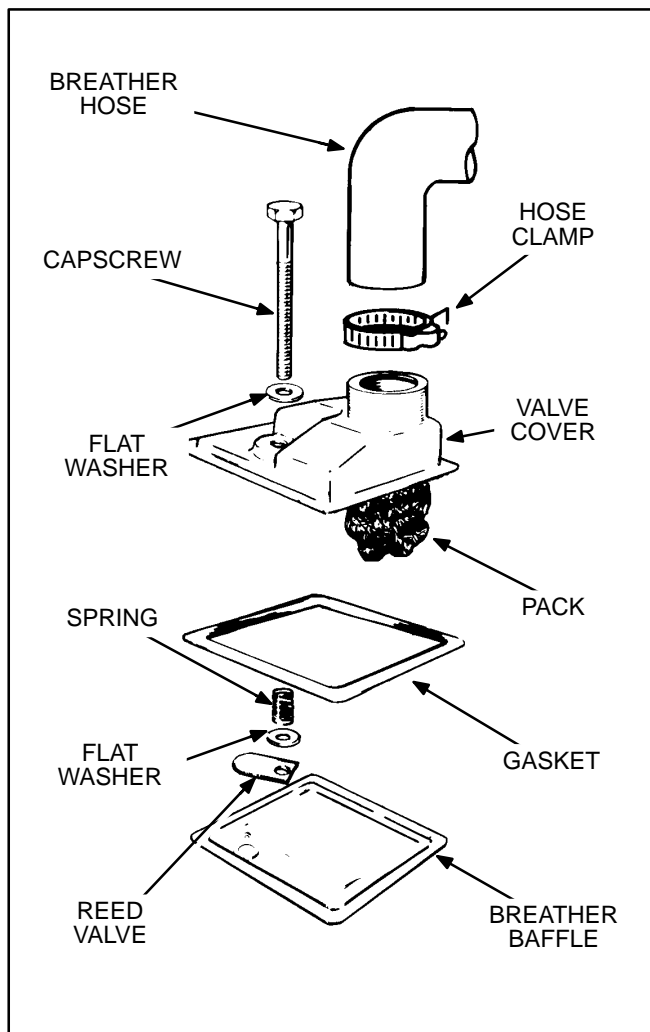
CRANKCASE BREATHER ASSEMBLY
